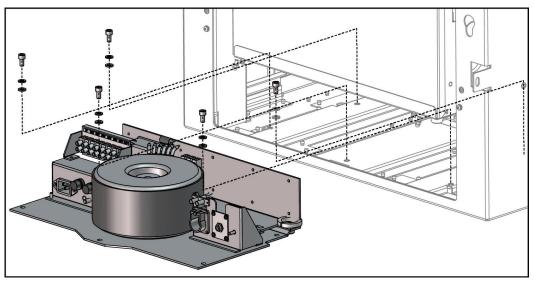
Unfastening mounting bolts and sliding power distribution assembly out of rear of chassis
